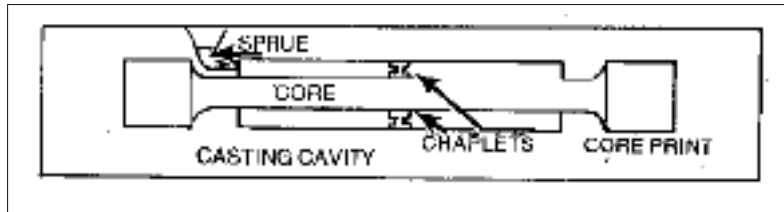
Casting mold containing a core which is supported by chaplets.
